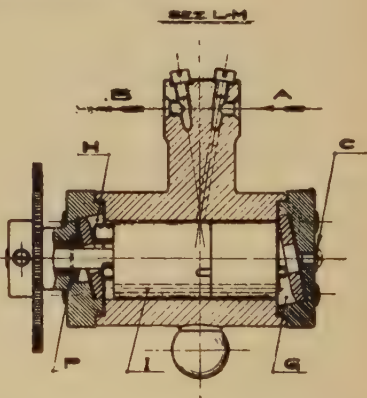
Borletti Piston Pump, Longitudinal Section. (Courtesy Fratelli Borletti, Milan.)
